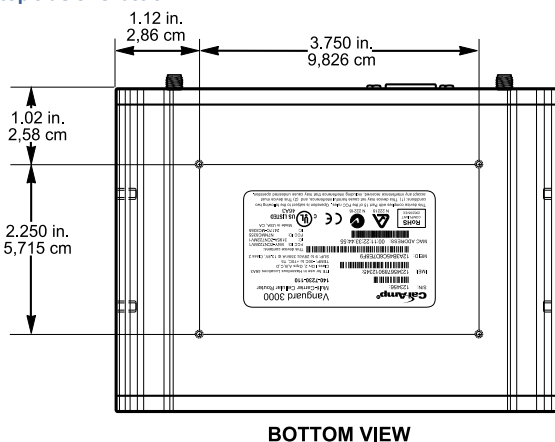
Base tapped mounting hole location detail — bottom of chassis. Same dimension on top side of Chassis.
